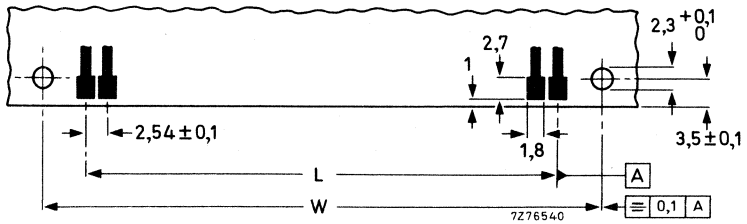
Recommended dimensions of the printed-wiring board to be fitted to the female part; see Table 5 for dimensions L and W.
